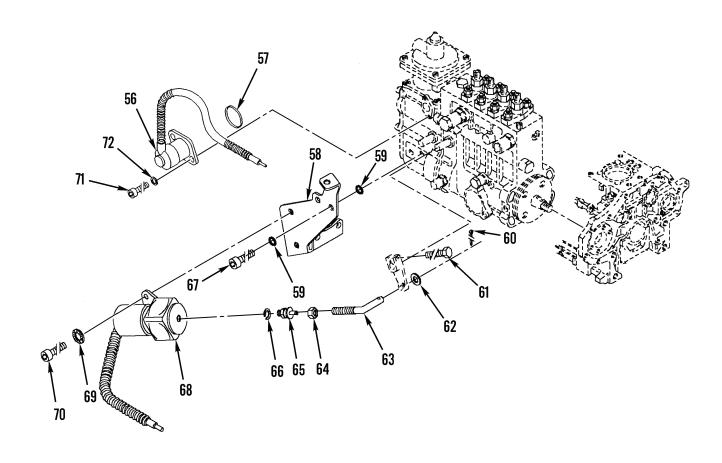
Fuel Injection Pump (Sheet 1 of 3)
